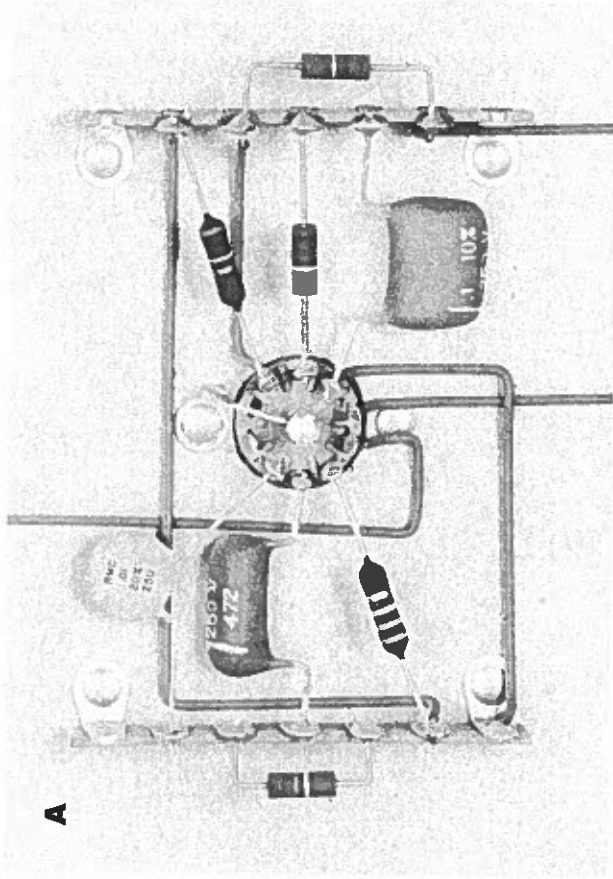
Connecting wires to lugs — just insert the wire in the lug, bend it over, and solder.
